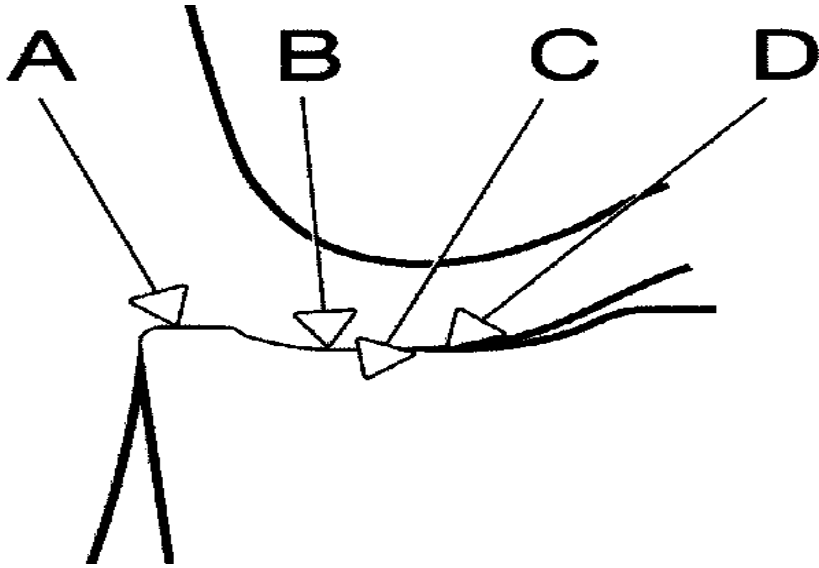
Wear zones on the cutting tool caused by chip formation
